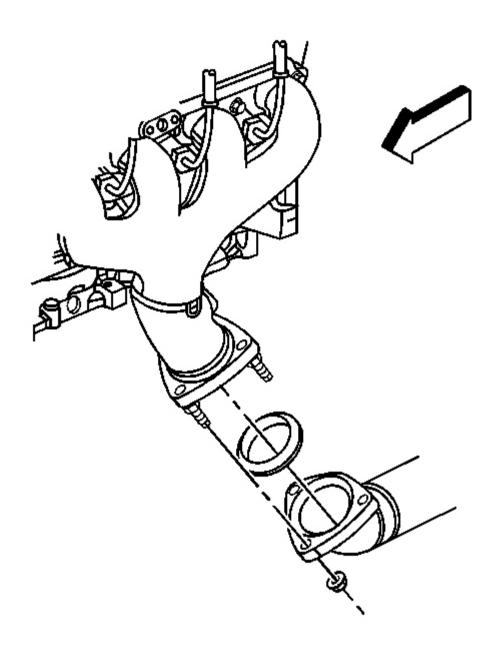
Exhaust Manifold & Nuts Courtesy of GENERAL MOTORS CORP.
